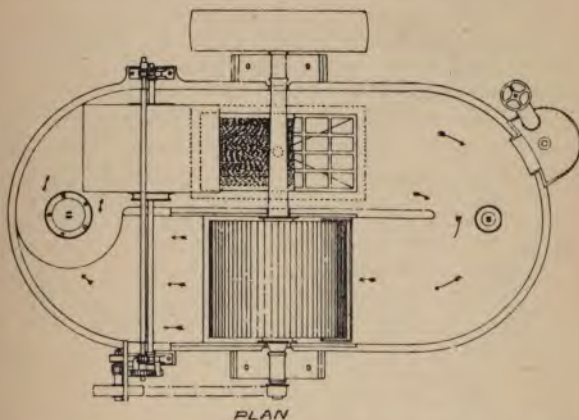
Combined breaking and beating engine, with drum washer, false bottom, button catcher, and breast washer.
